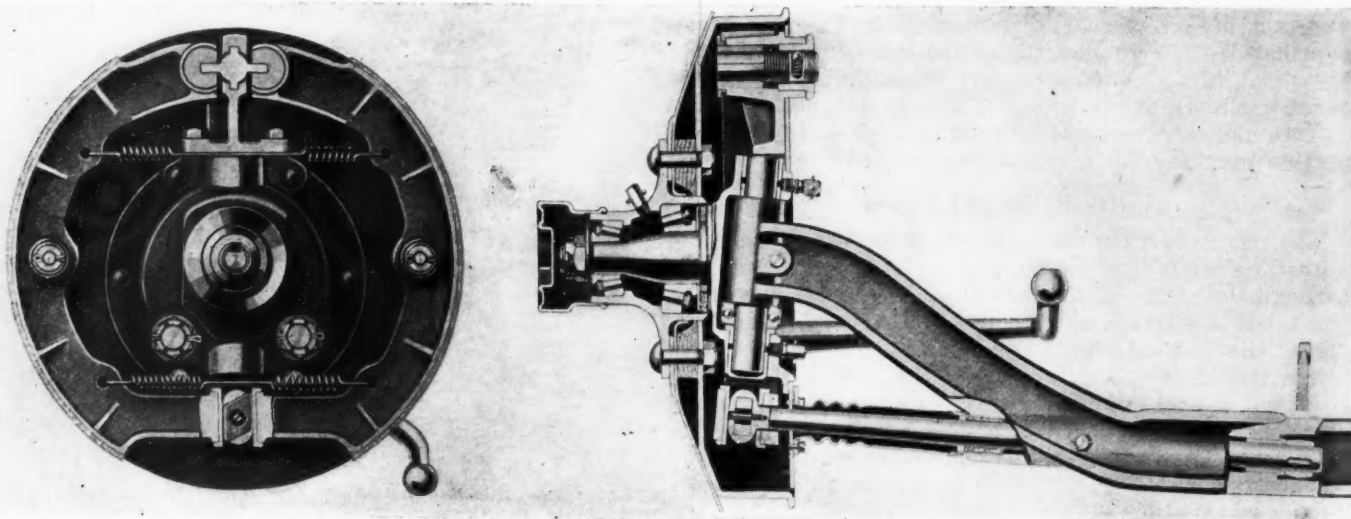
End view and vertical section of Rickenbacker front wheel brake and axle, showing shape and arrangement of the floating cam and camshaft
